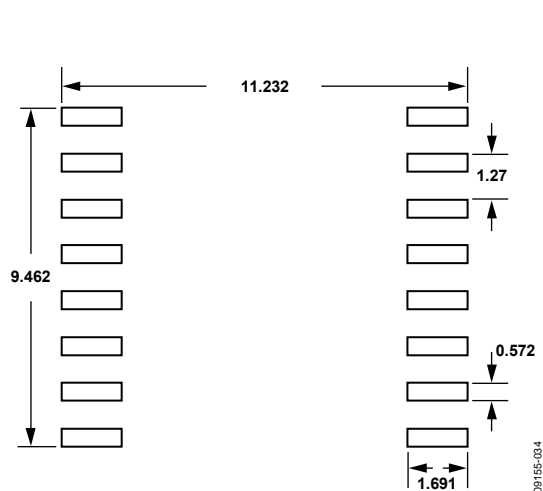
Sample SOIC_CAV Solder Pad Layout (Land Pattern), Dimensions Shown in Millimeters, Not to Scale
